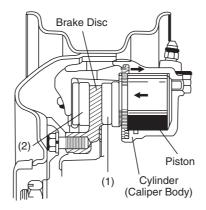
Sectional View of Single Position Floating Caliper Type Disc Brake
